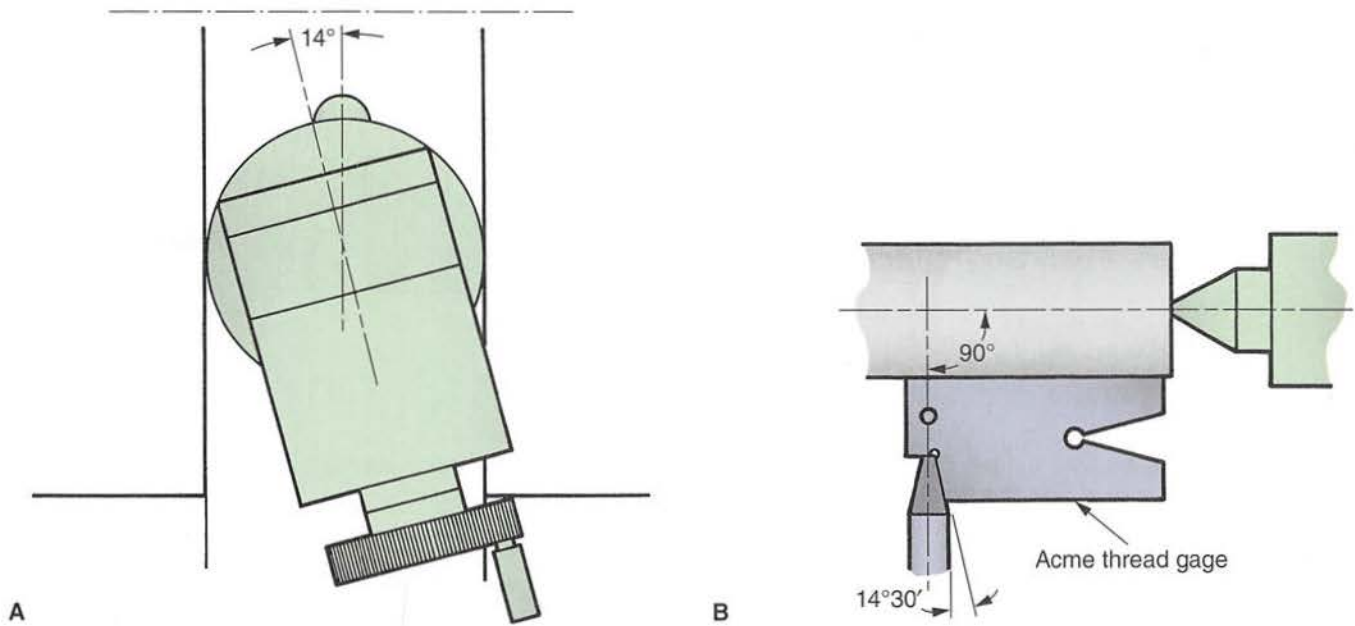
The Acme screw thread gage and tool setup gage allow you to check lathe settings.
